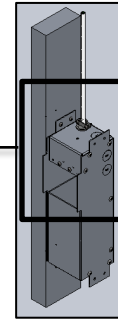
CONDUIT FITTING TO J-BOX ASSEMBLY
